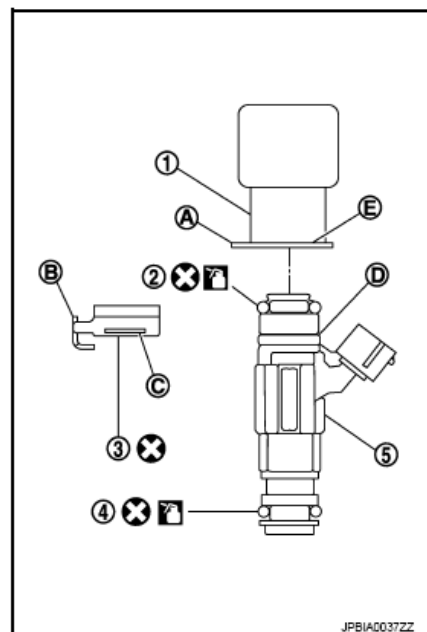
Identifying Fuel Tube, Fuel Injector, Flange And O-Rings
